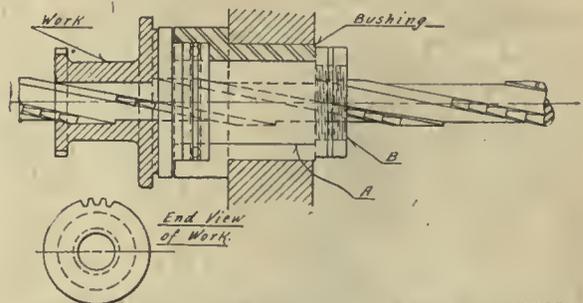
ARRANGEMENT FOR SPIRAL BROACHING.
